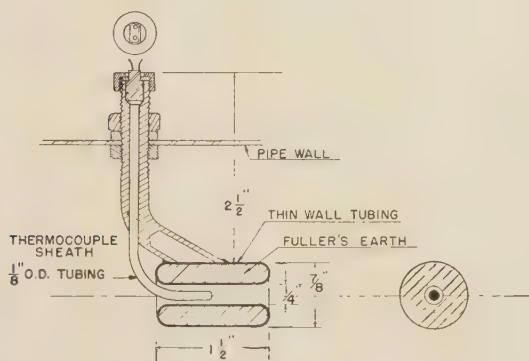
SMALL INSULATED SHIELD THERMOCUPLE MOUNTING
